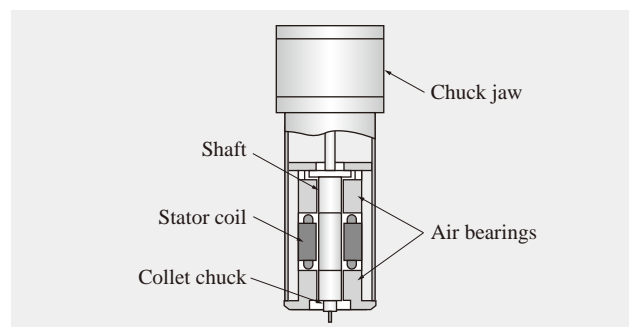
Spindle Structure. The internal structure of a high-speed spindle with air bearings is shown.
